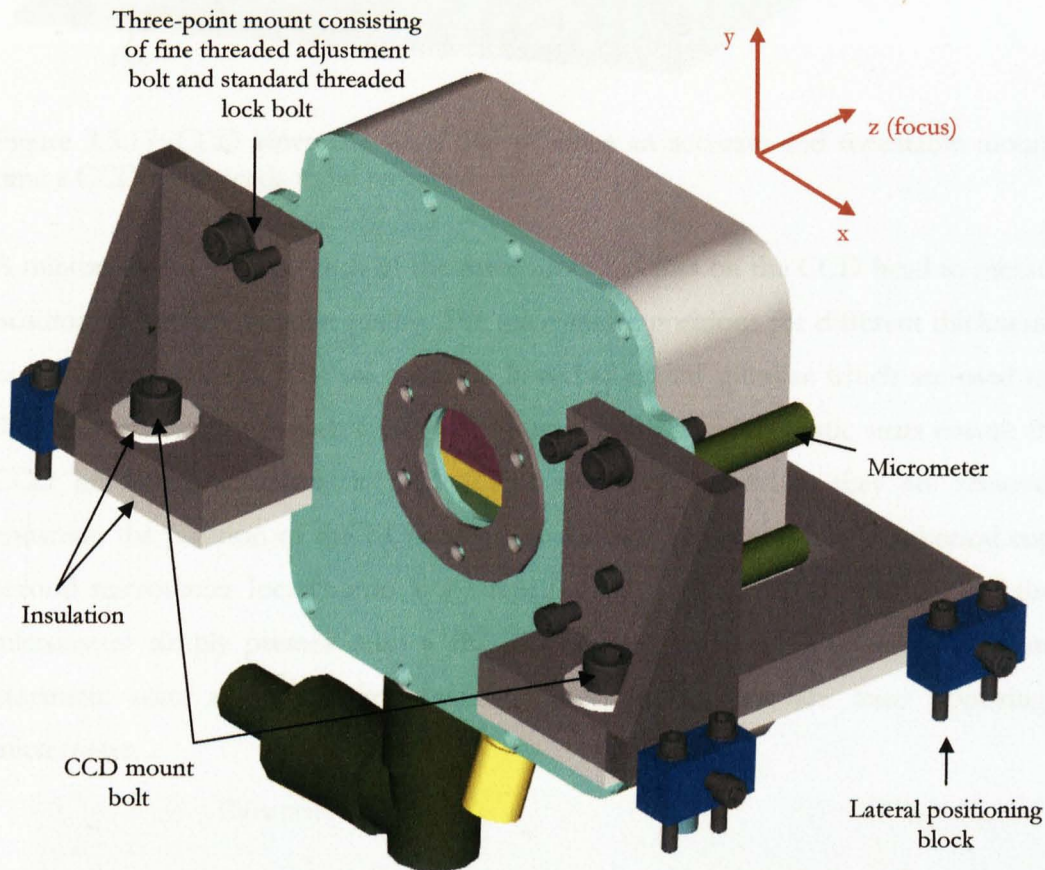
Green CCD head mount with CCD head fitted. The blue camera mount is very similar to this mount.
